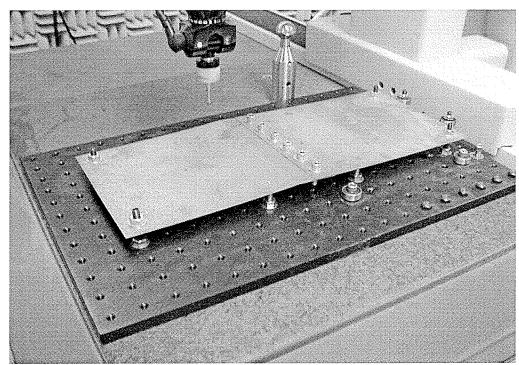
Assemble the sheet metal parts together and release the middle fixtures
